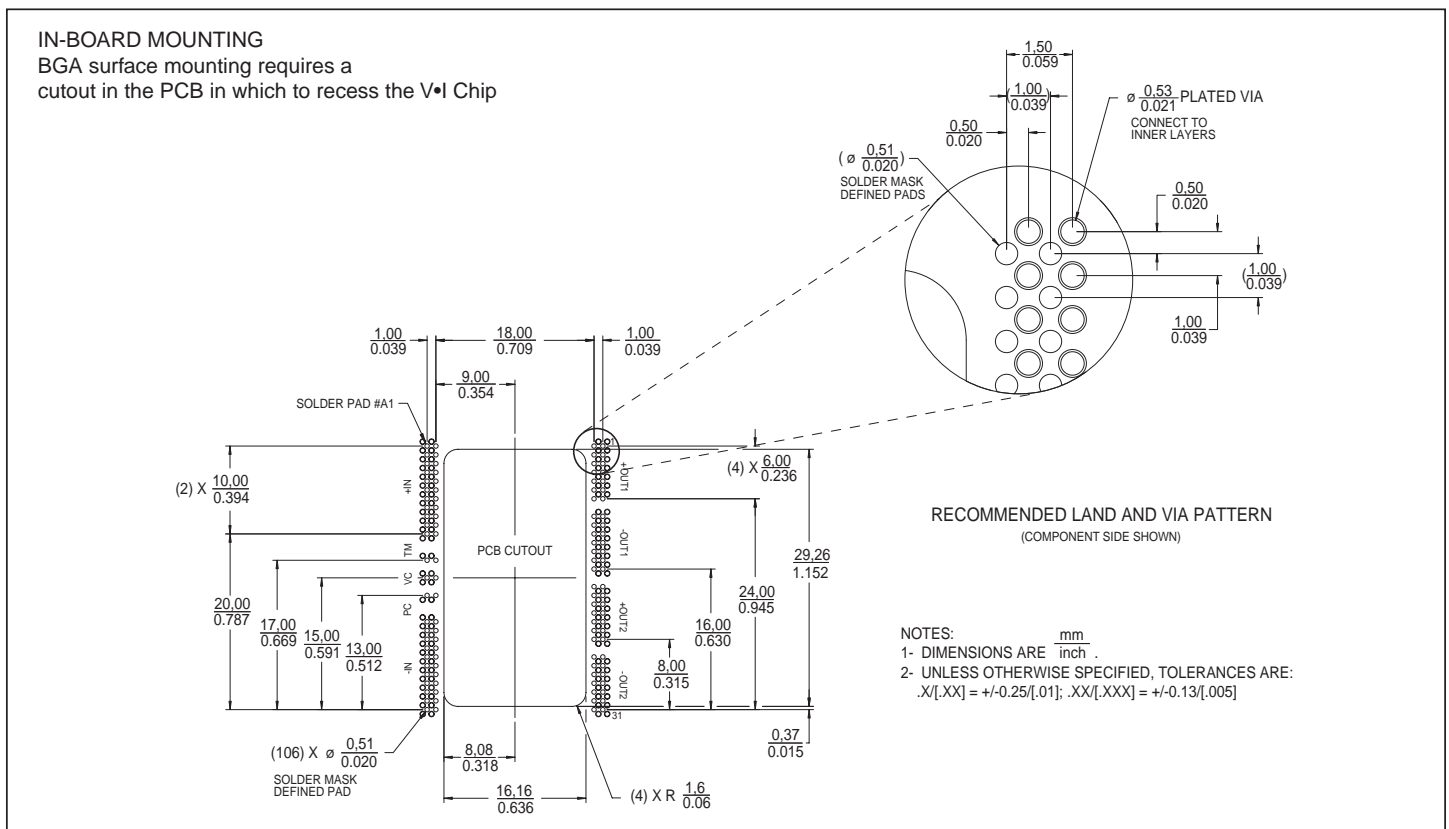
VTM BGA PCB land/VIA layout information; In-board mounting
